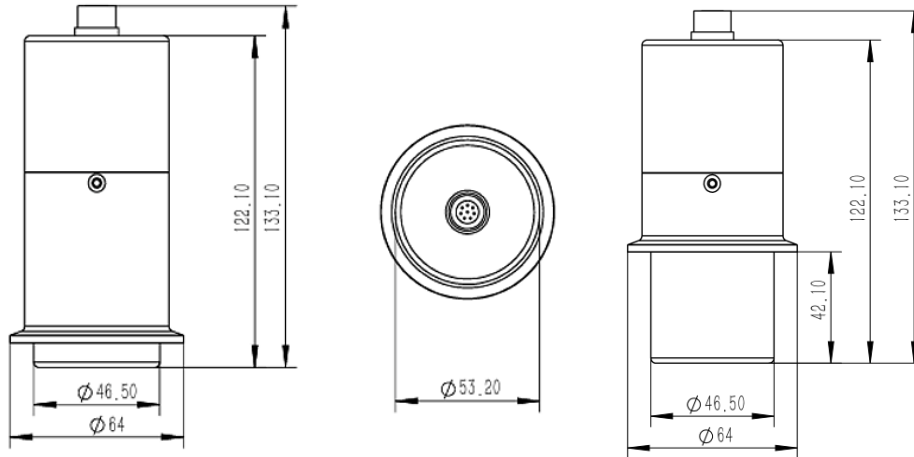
Prism RT-110 and RT-110L Sensor Dimensions (mm)
